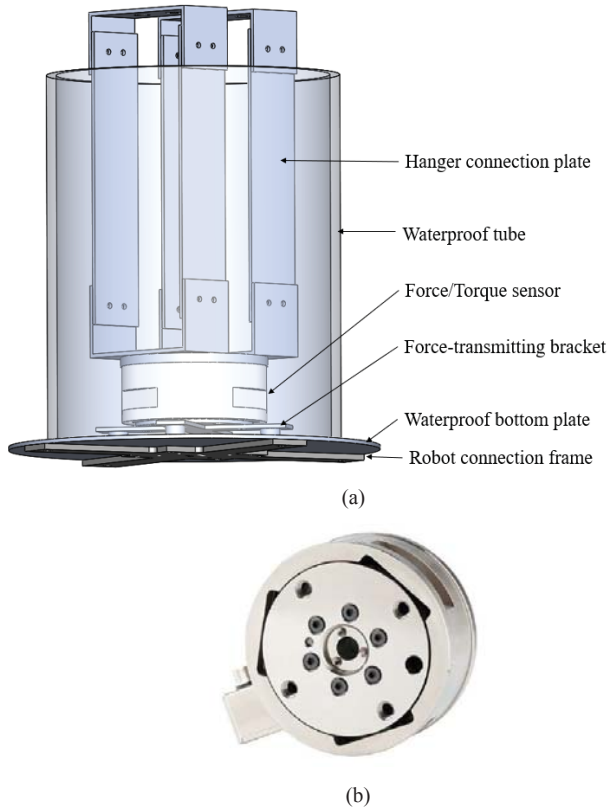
Force measurement device. (a) Assembly drawing of the equipment. (b) ATI force/torque sensor.
